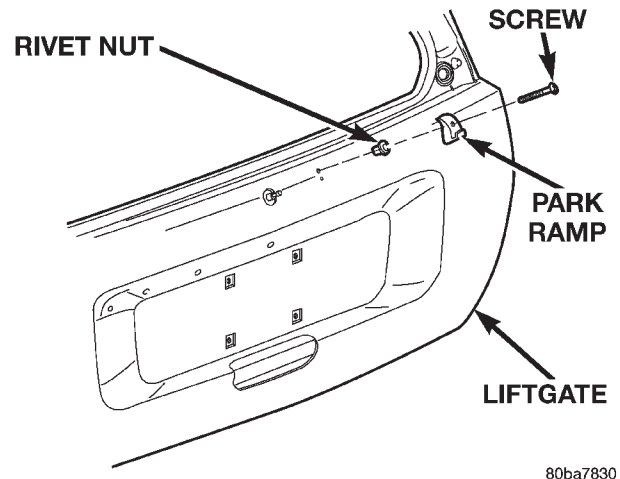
Rear Wiper Arm Park Ramp Remove/Install
